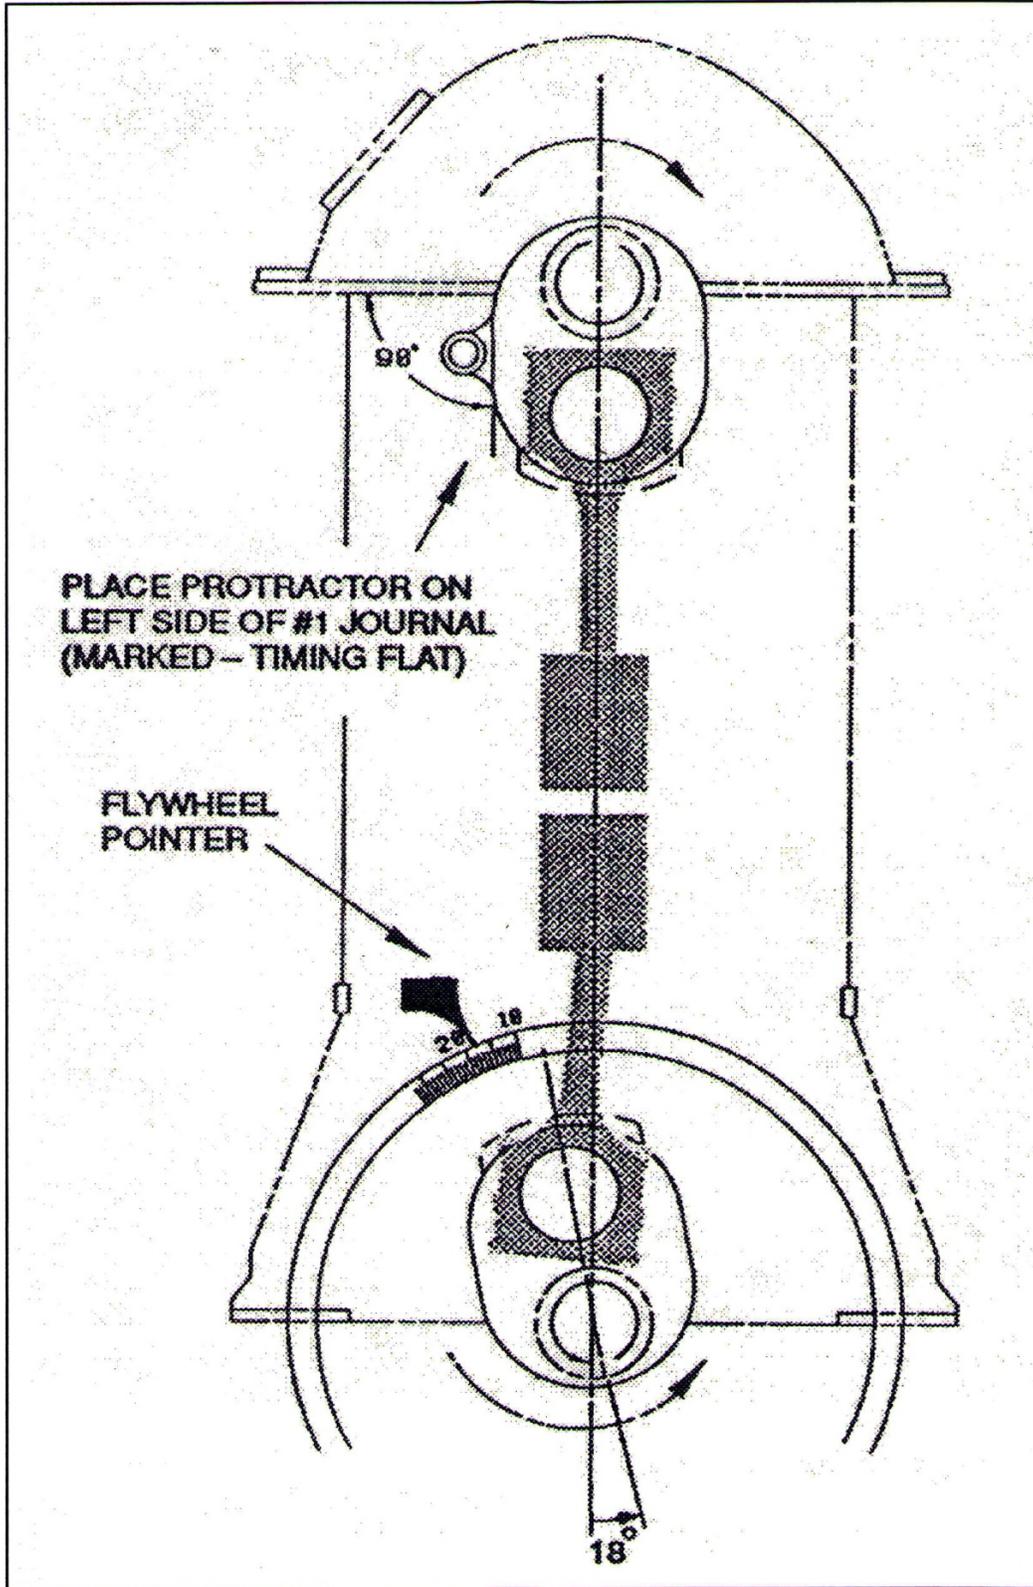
Crank-Lead Timing Viewed from Drive End
